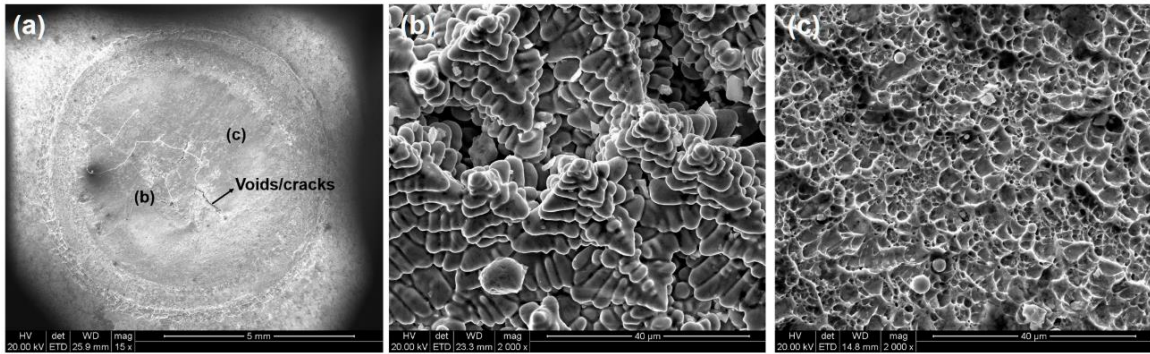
SEM fracture surfaces in tensile-shear sample via IF in RSWs of B1500, (a) overview of fracture surface, (b) brittle fracture surface and (c) ductile fracture surface[109].
